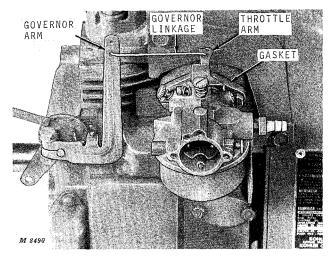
Installing Carburetor Assembly (K181S Engine)
